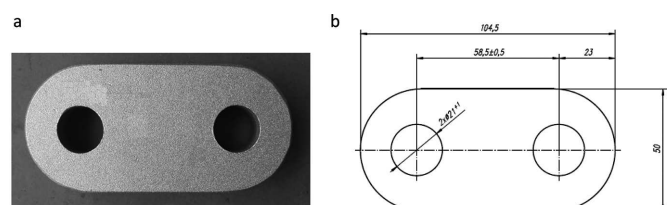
The view and dimensions of the tested materials – SLINK; a – general view, b – the basic dimensions
